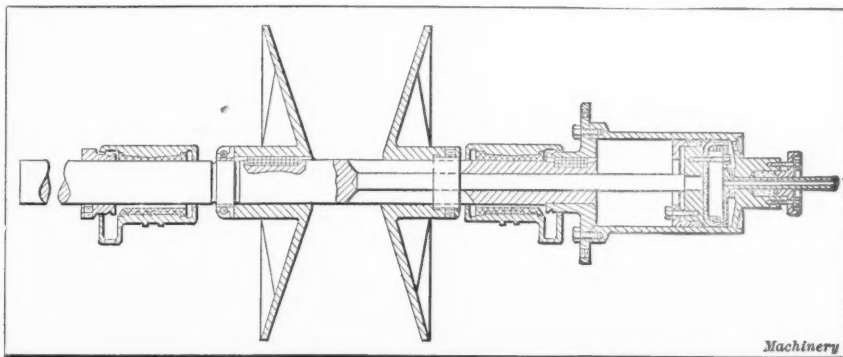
Cross-sectional View showing Design of Hydraulic Speed-changing Device
